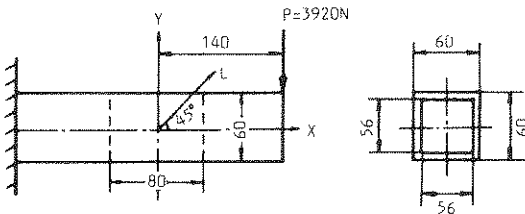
Carbon filter composite box beam under bending. Dimensions are in millimeters.
